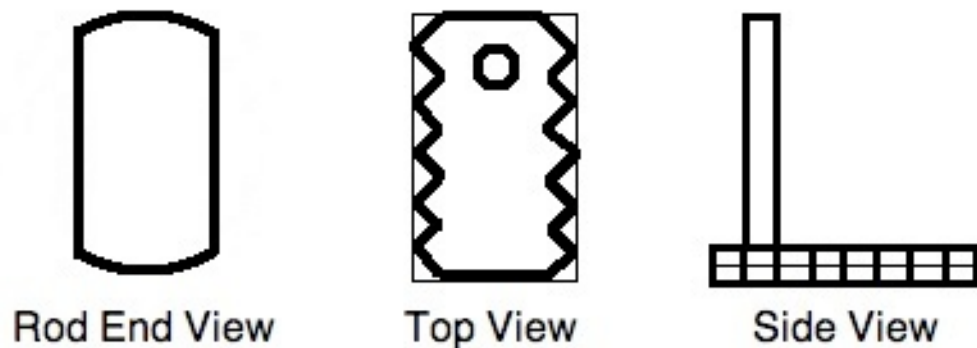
Threaded Nylon Rod Mounted to Metal Rod
